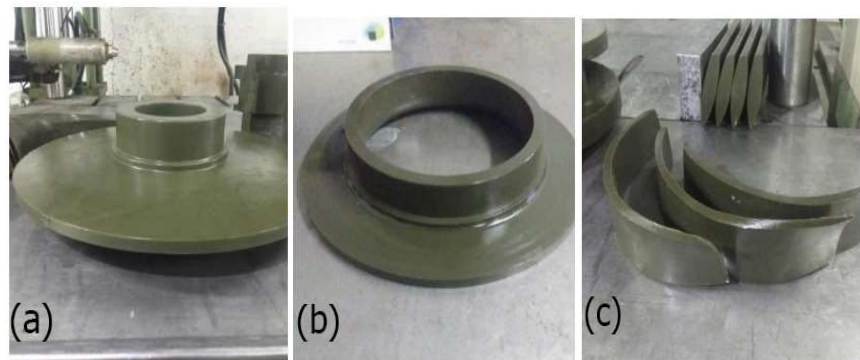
Wax pattern of impeller, (a) Hub, (b) Upper shroud, (c) Blade
